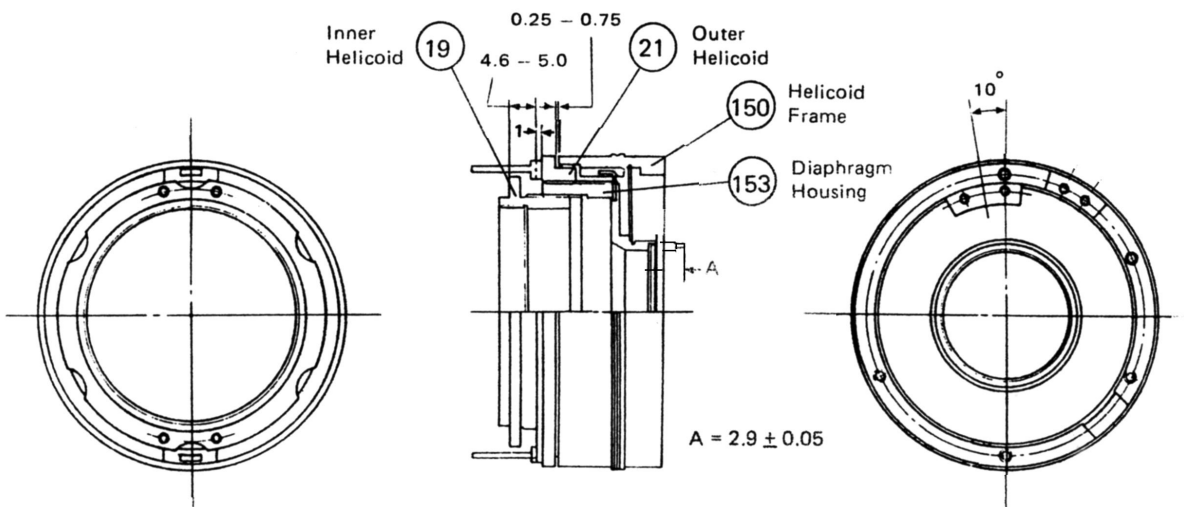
Helicoid Assembly Critical Dimensions, Olympus Mount
